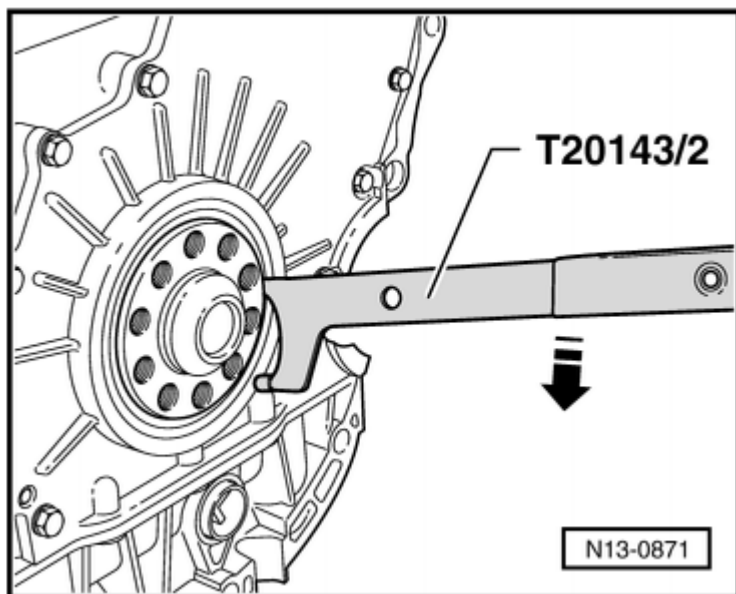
Identifying Removal Hook T20143/2 Placed Behind Sealing Lip Of Oil Seal
